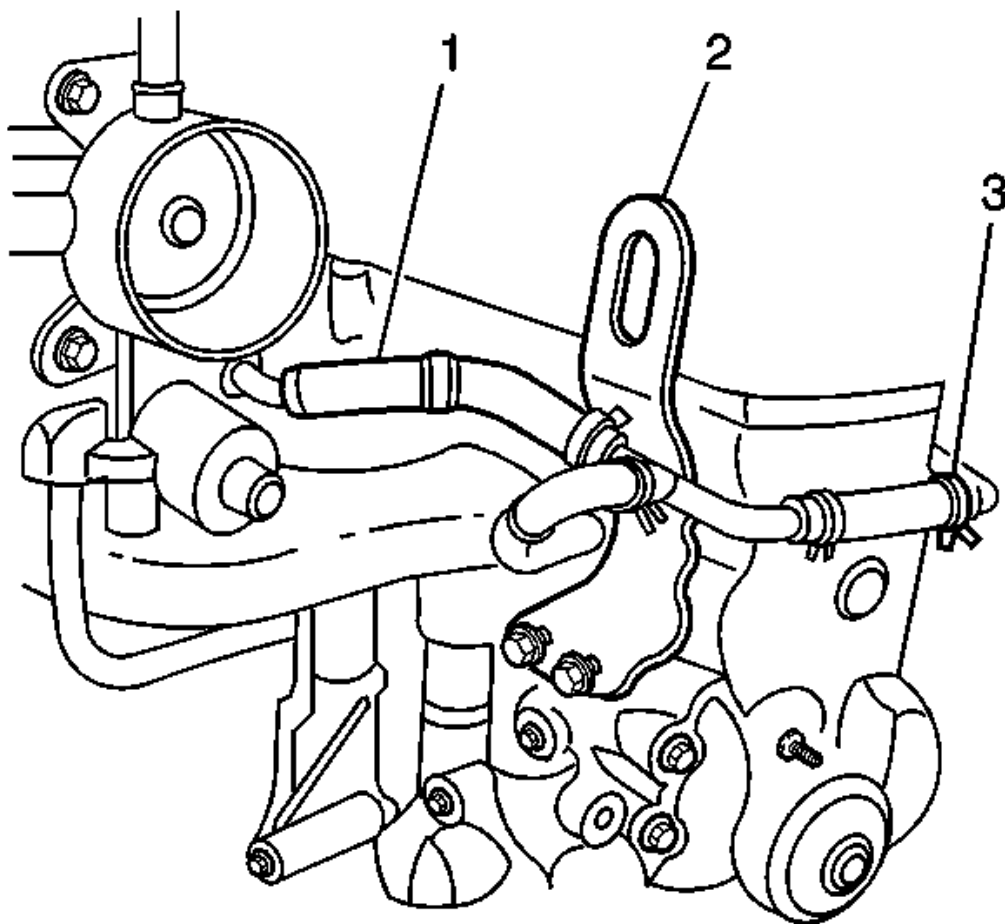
View Of Water Bypass Pipe Bracket & Hose
